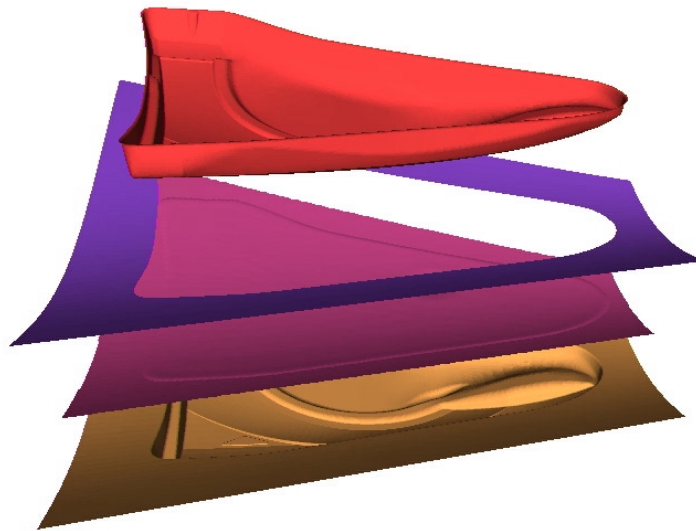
FE model of a stamping process. The parts are from top to bottom: punch, blankholder, blank, and die.
